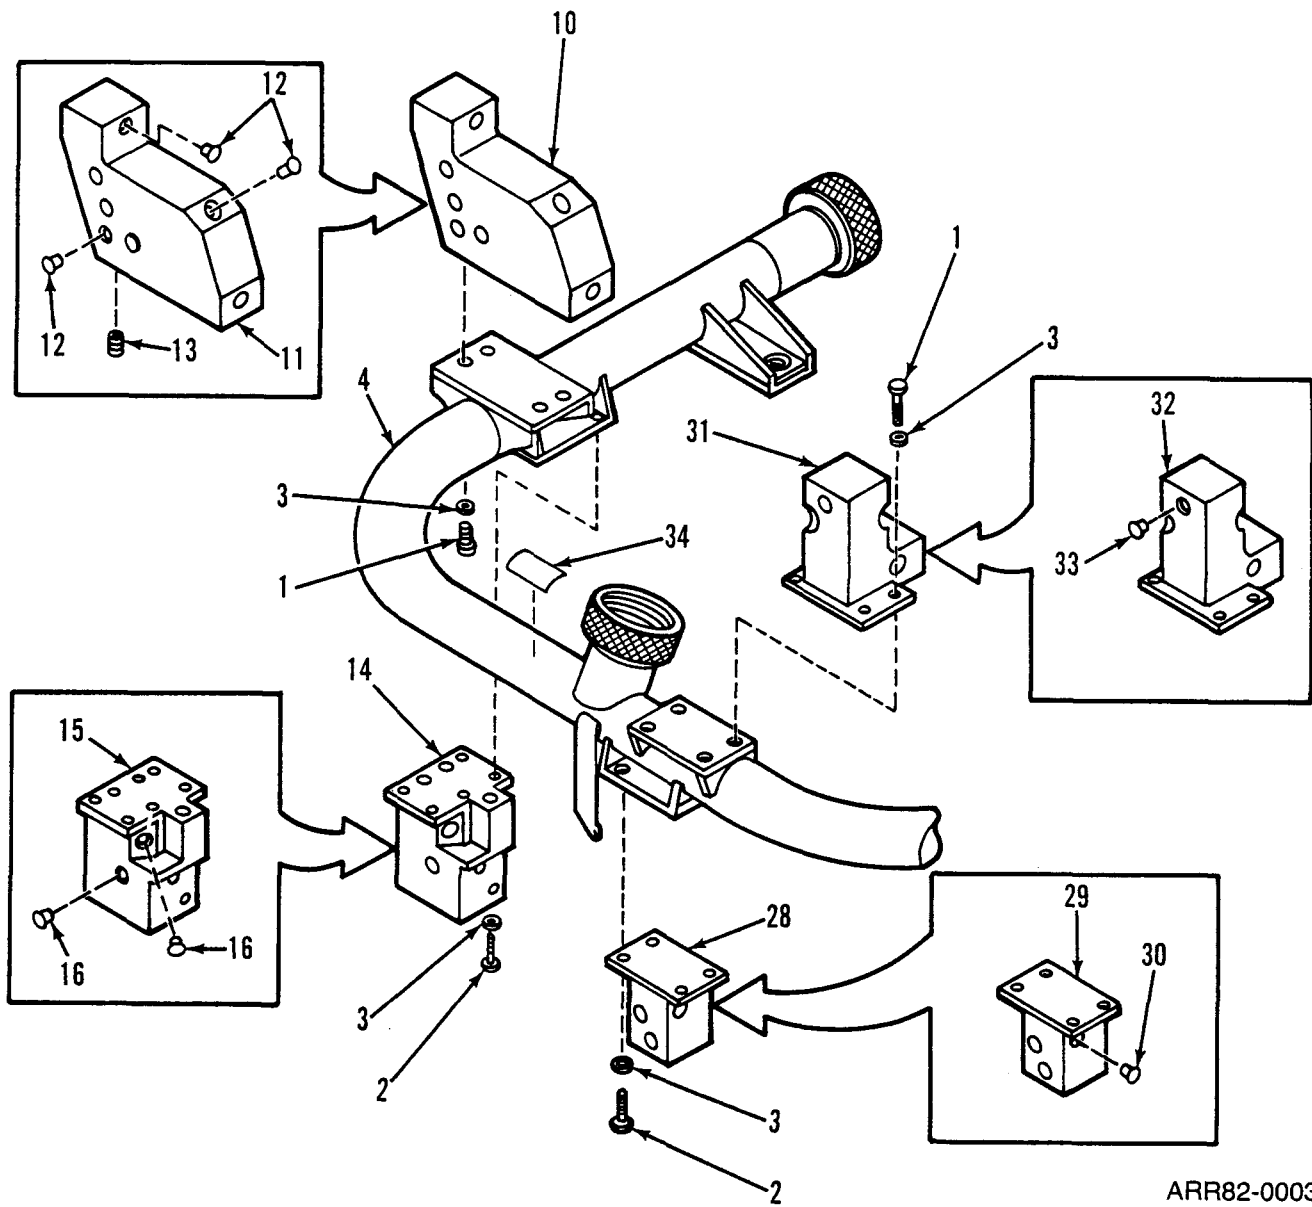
Foresight Assembly, Group 9307A (Sheet 1 of 2)
